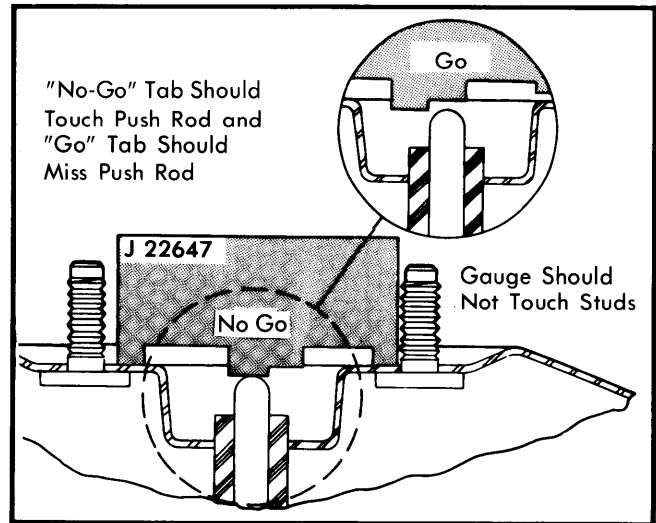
Using "Go/No-Go" Push Rod Gauge to Measure Height of Push Rod
